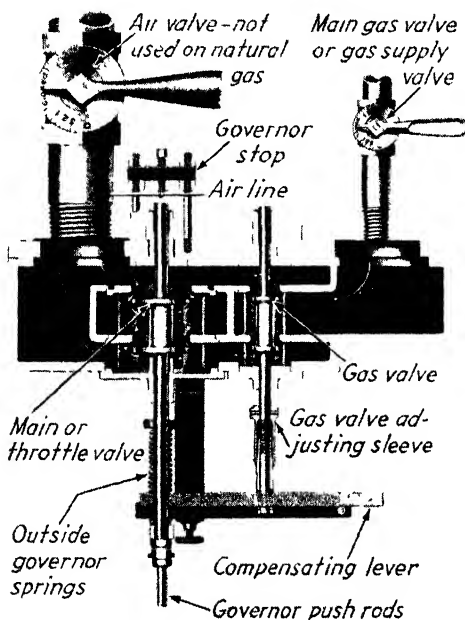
Ingersoll-Rand gas-fuel mixing valve.
